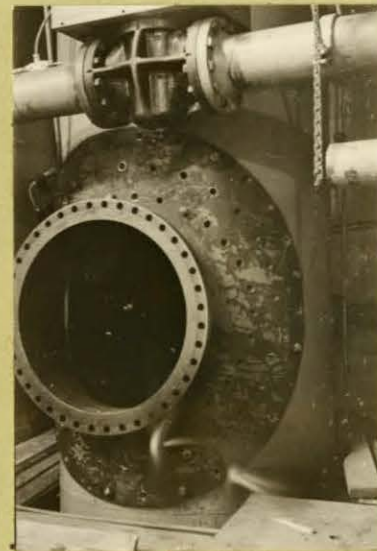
Lower Stilling Tank Nozzle Attached for Riveting.
